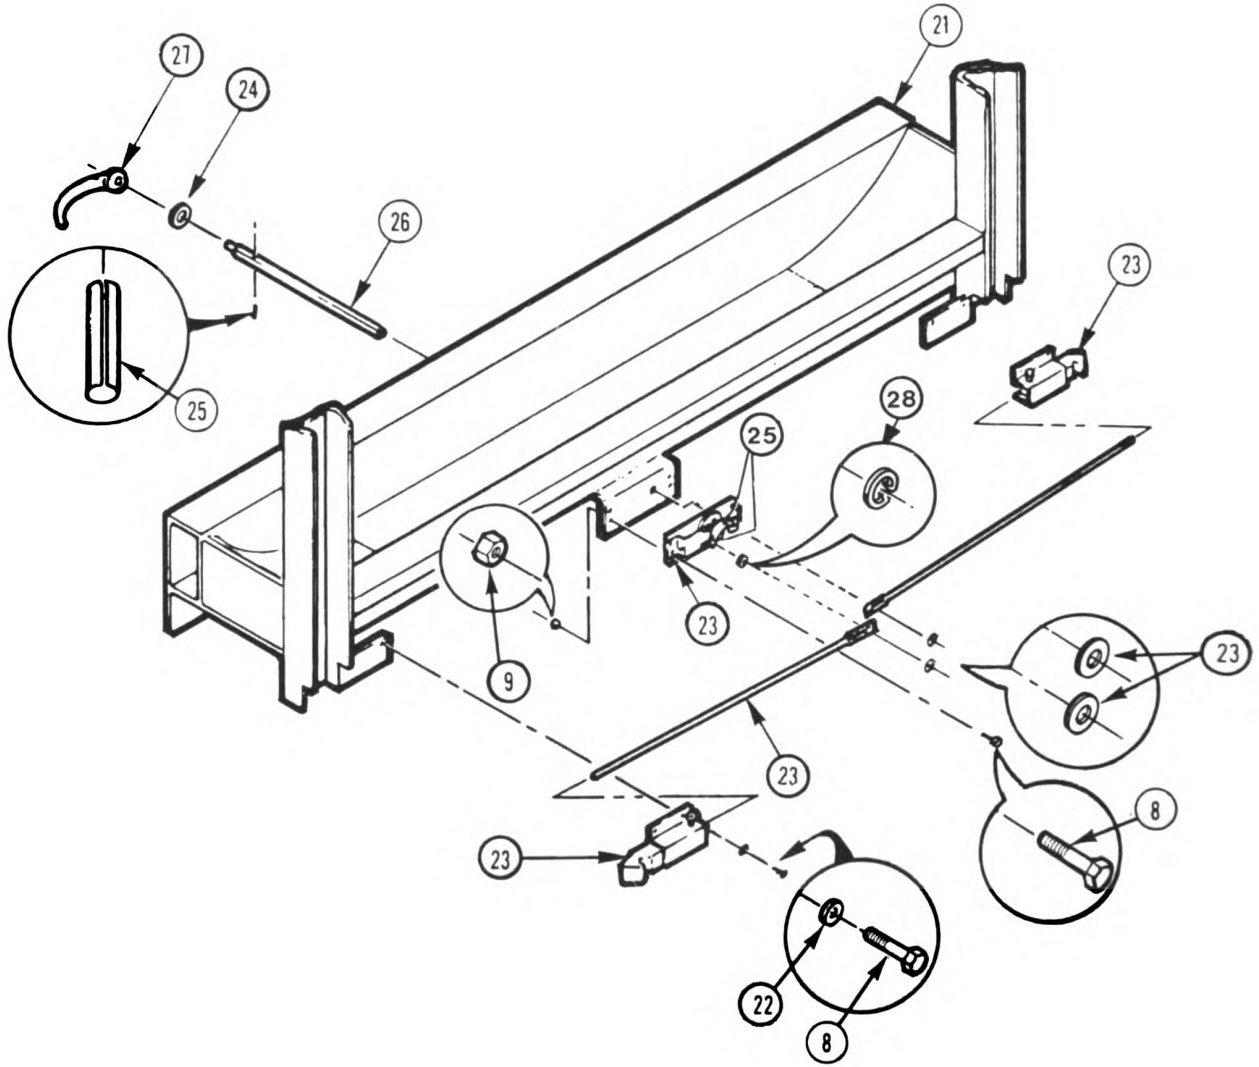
Cable Storage Rack Assembly (Sheet 2 of 2)
